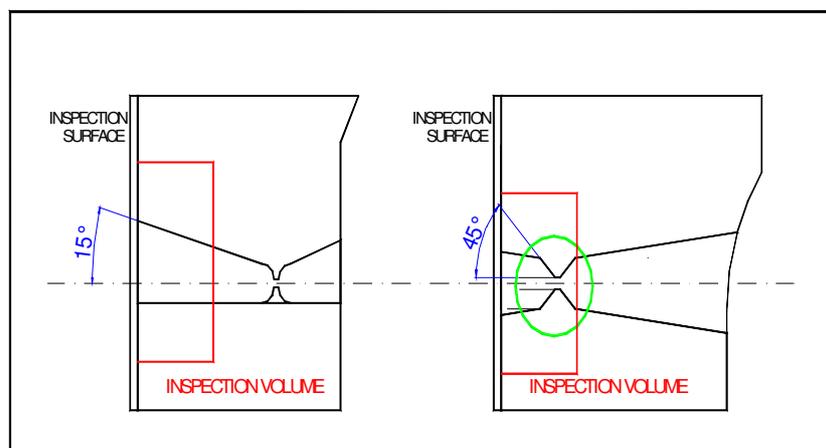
Location of the weld centre line with a zero degree probe.
